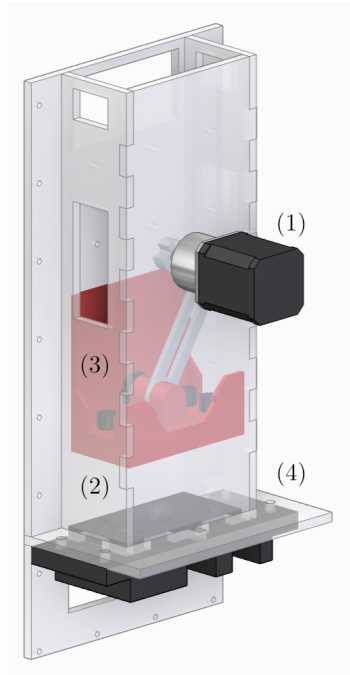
Model of pumping mechanism. (1) Stepper motor. (2) Airbox (artificial lung). (3) Piston assembly. (4) Bottom plate with inlets for the solenoid valve, the water atomizer, and the SCD41-sensor.
